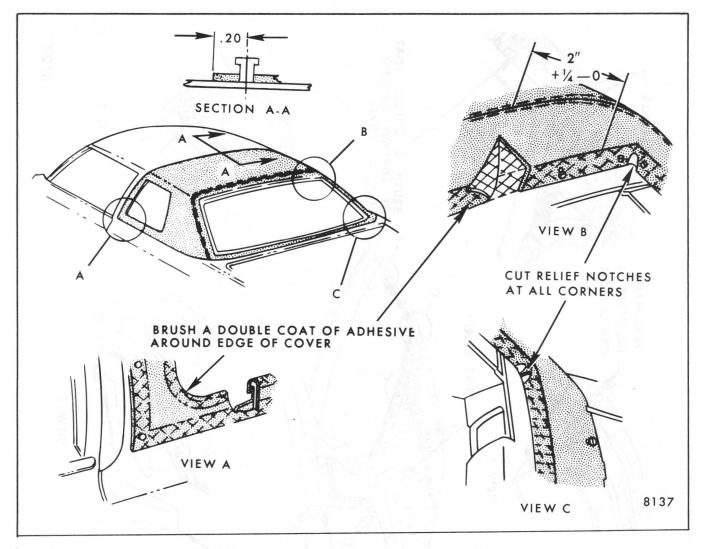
Landau Fabric Roof Cover Installation (CB4 Option)
